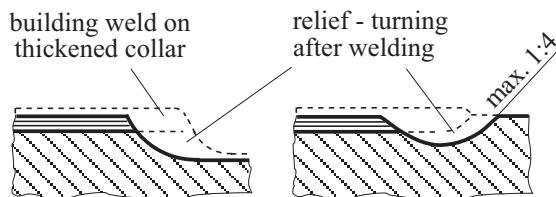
Build-up welds applied to rudderstocks and pintles
